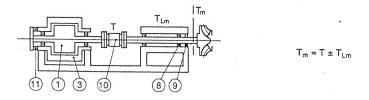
Arrangement using a torquemeter with machine bearings and seals not in balance
